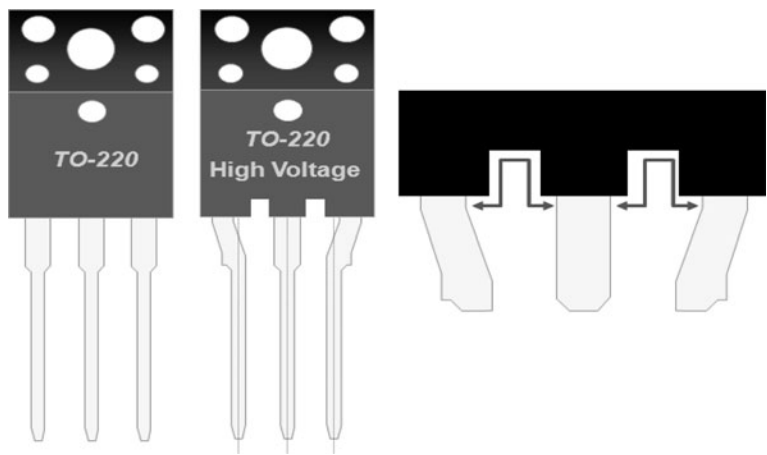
The design layout for high voltage TO-220 package with groove
